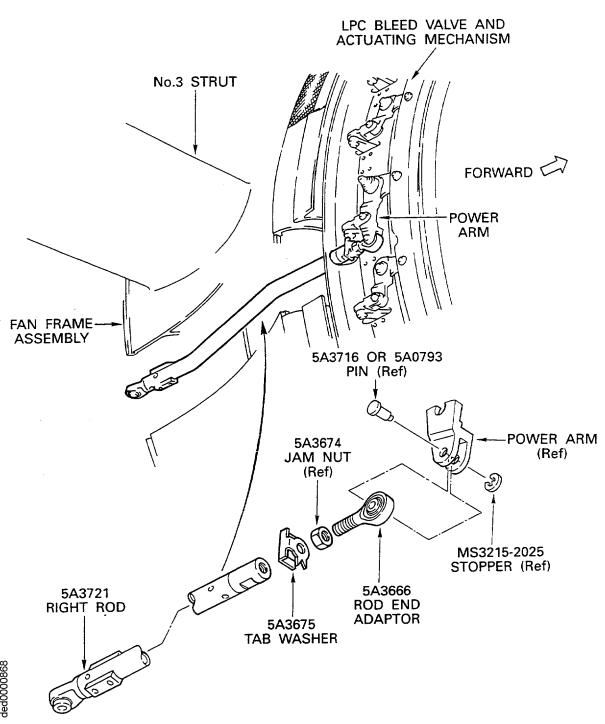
Before Alteration of the Right Rod Assembly of LPC Bleed Valve
